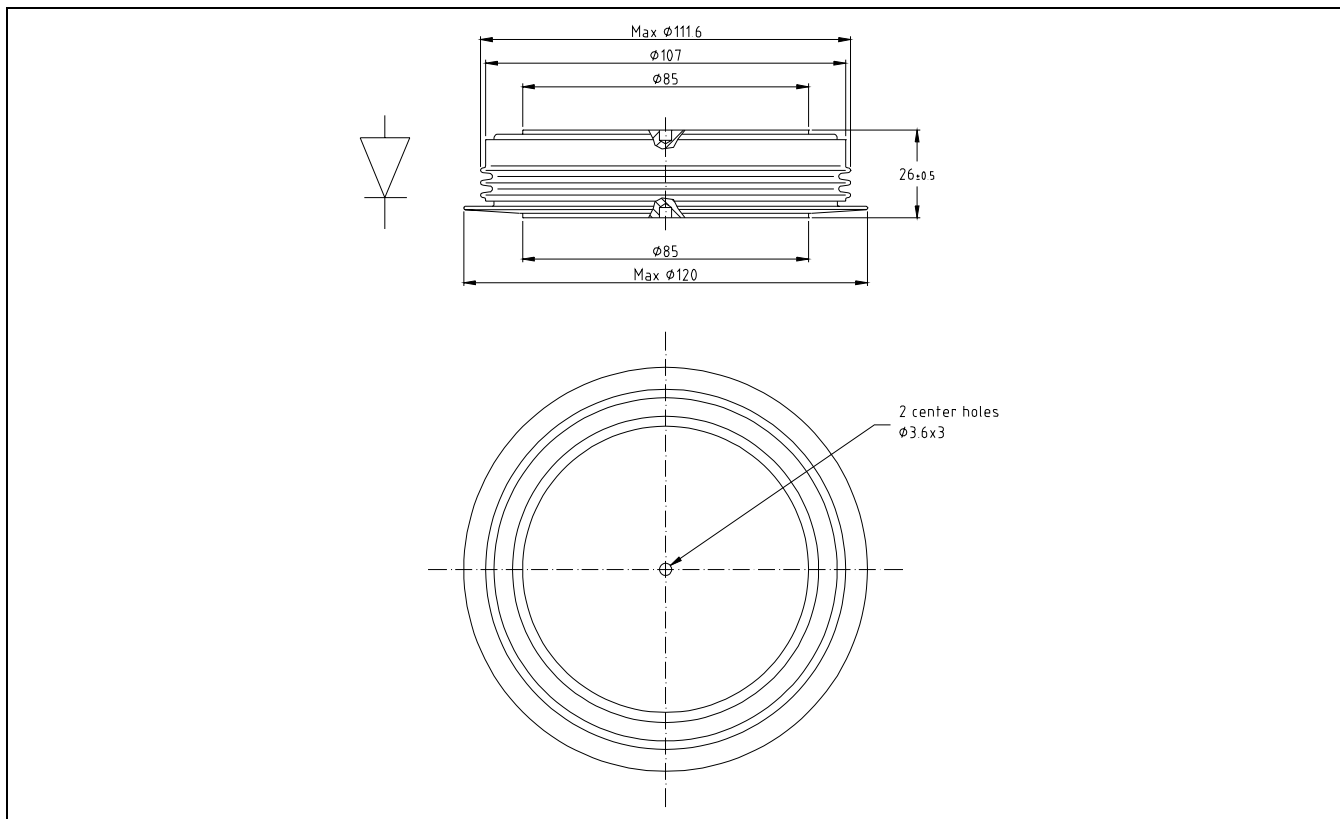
Outline drawing. All dimensions are in millimeters and represent nominal values unless stated otherwise.
